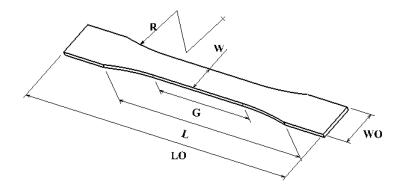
The dimensions of the tensile specimens according to ASTM 638-10
